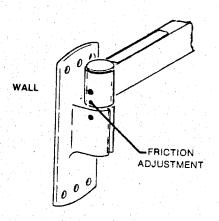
EXTENSION ARM FRICTION ADJUSTMENT
